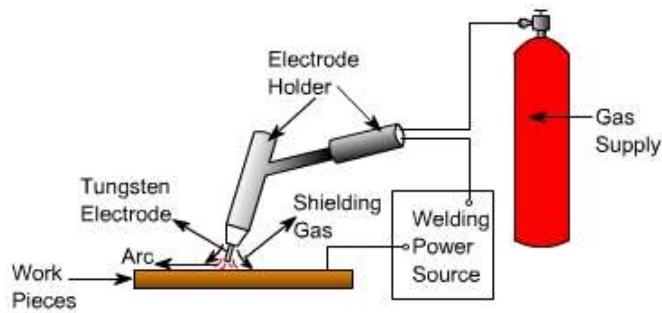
Schematic diagram of TIG welding system
